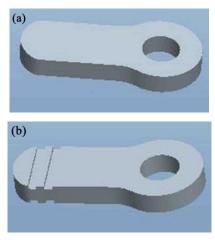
Part drawing of (a) the common-used and (b) the revised hammer handle.
